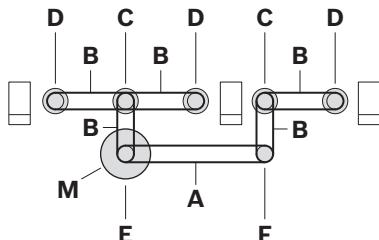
Sliding support wheels on the shaft, exchanging O-rings
